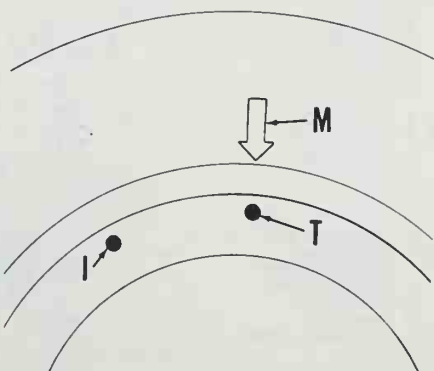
View of timing marks on crankshaft pulley used on some models.
